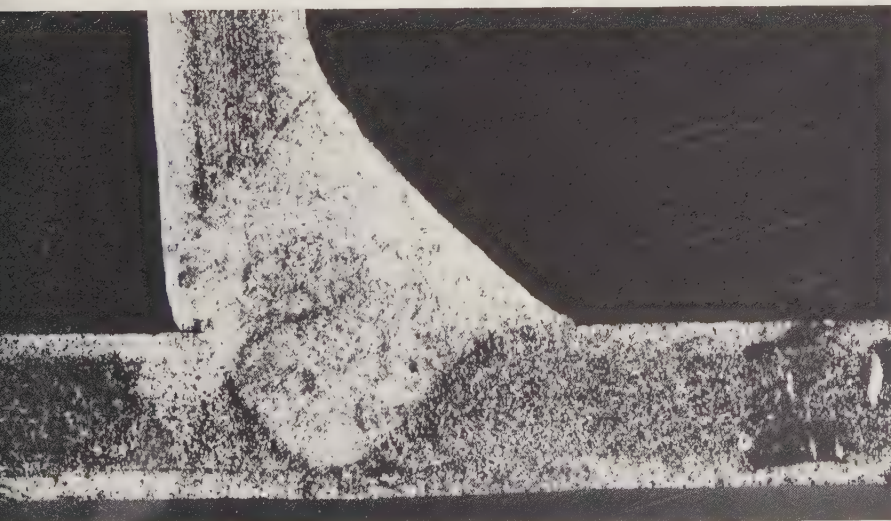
In this fillet weld, a slight improvement was noted when the helium-nitrogen gas mixture was used.
